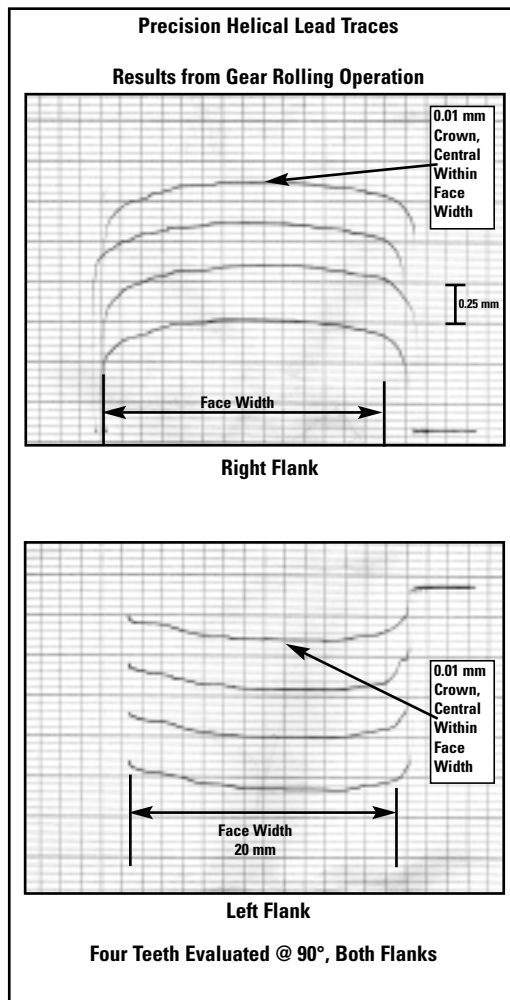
Gear tooth lead error traces on rolled densified helical gears taken at 90° intervals on the gears.
